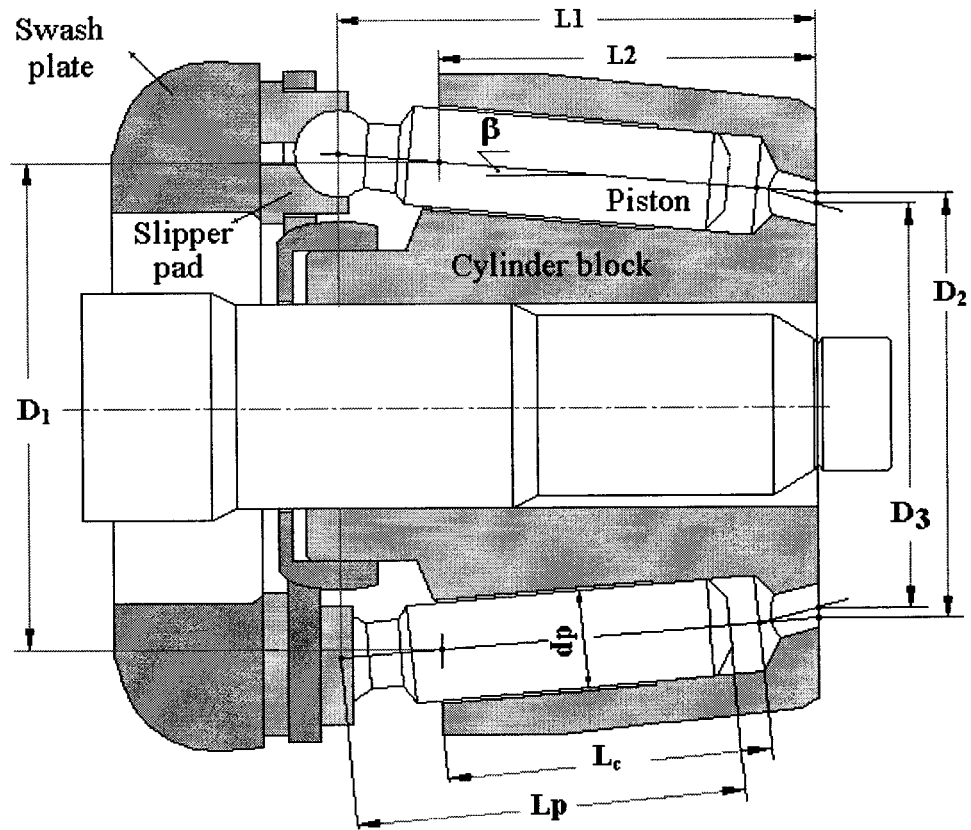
Main dimensions of swash plate axial piston pump with conical cylinder block
